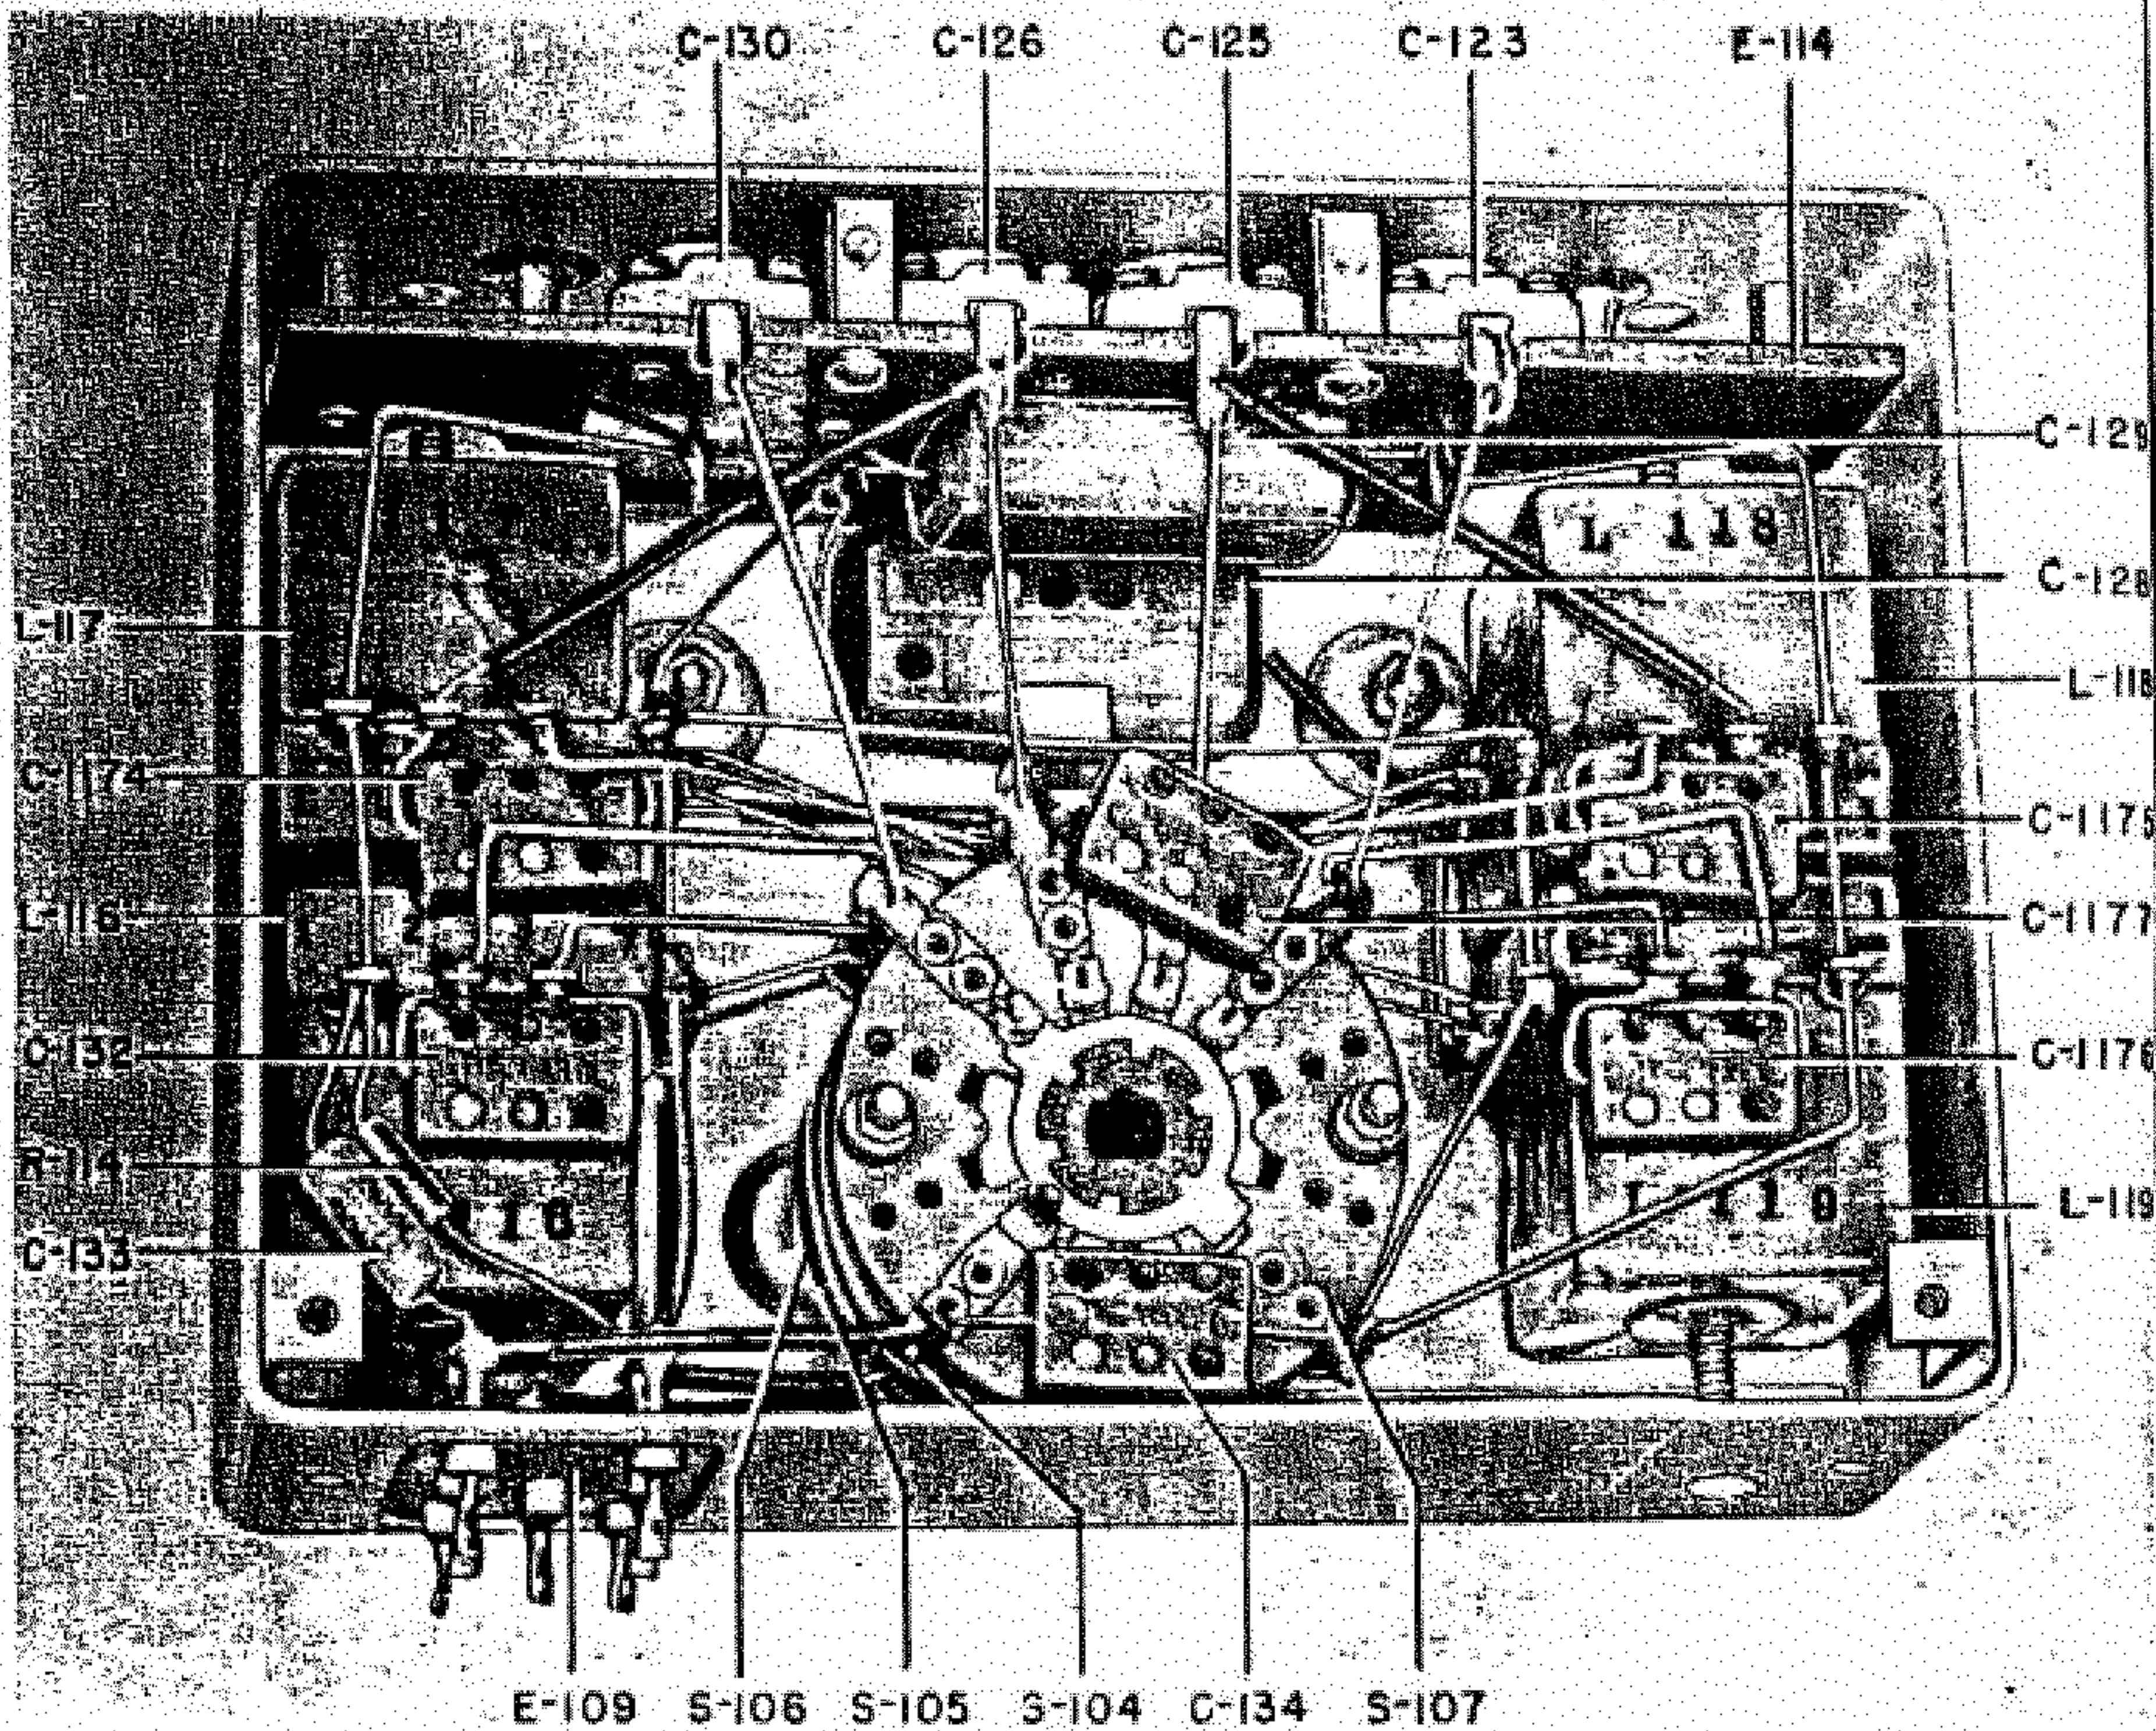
Antenna Transformer Assembly L-103, Cover Removed
